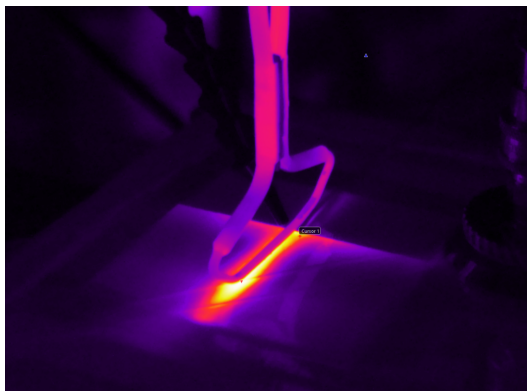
Thermal image of the weld zone during continuous induction welding.
